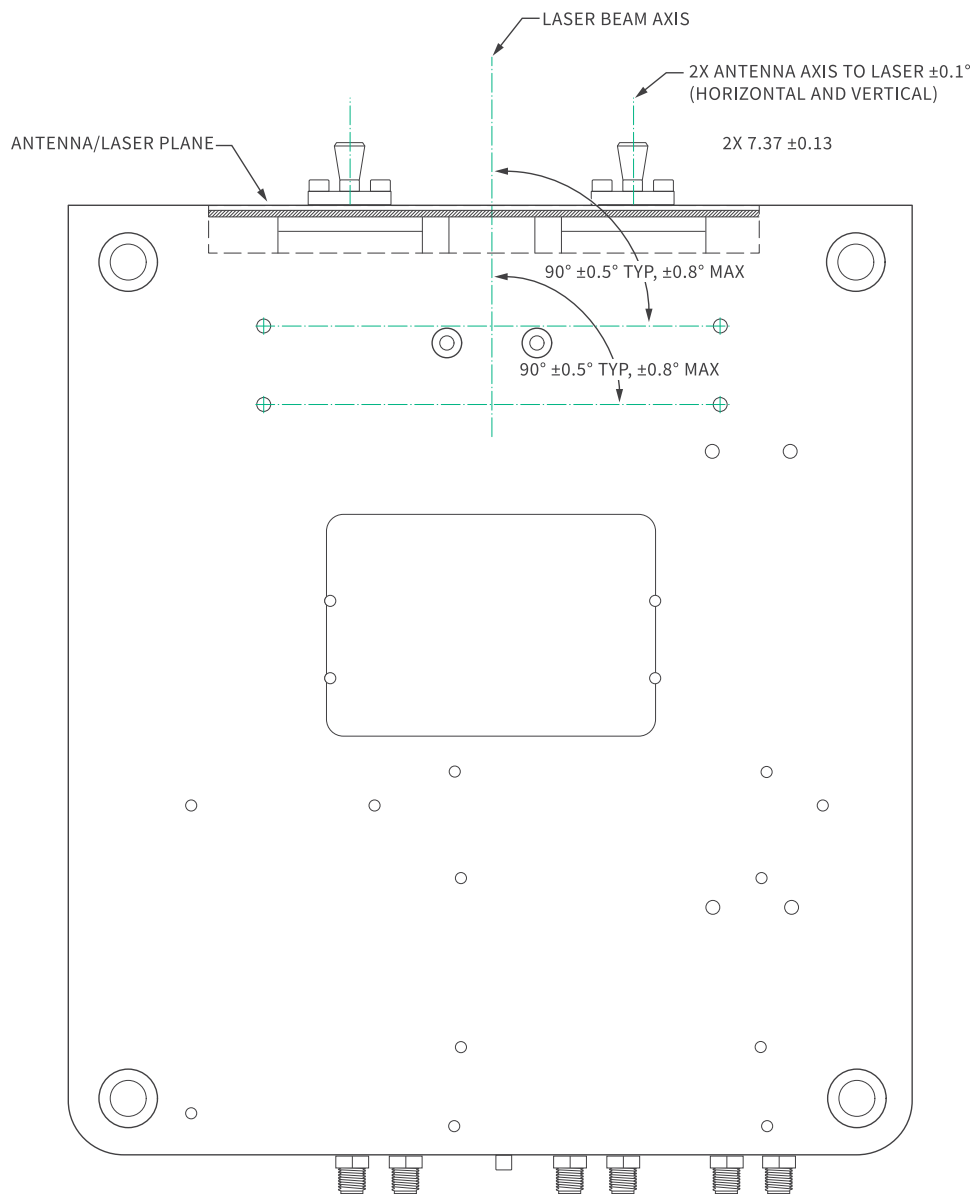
mmRH-5591 Laser Tolerance, Bottom View
